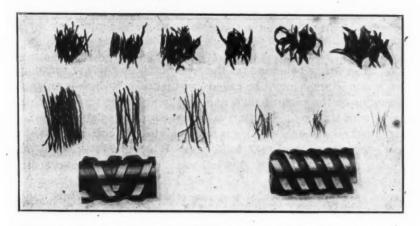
Helical Cutters, Single and Interlocked, and Chips Produced by them. i
